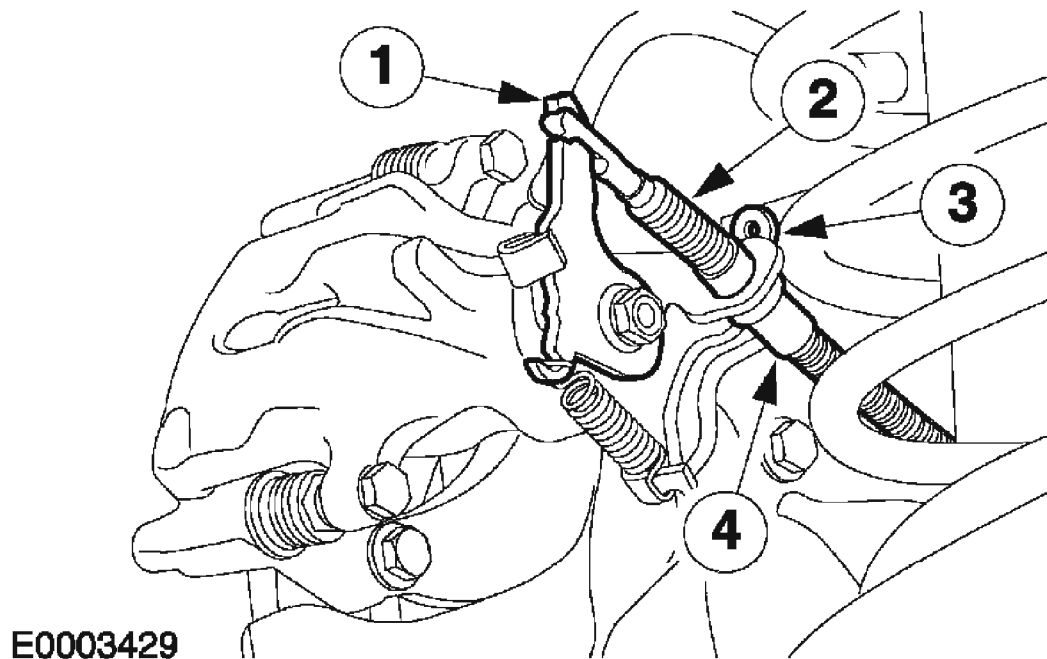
Removing Parking Brake Cable From Brake Caliper
